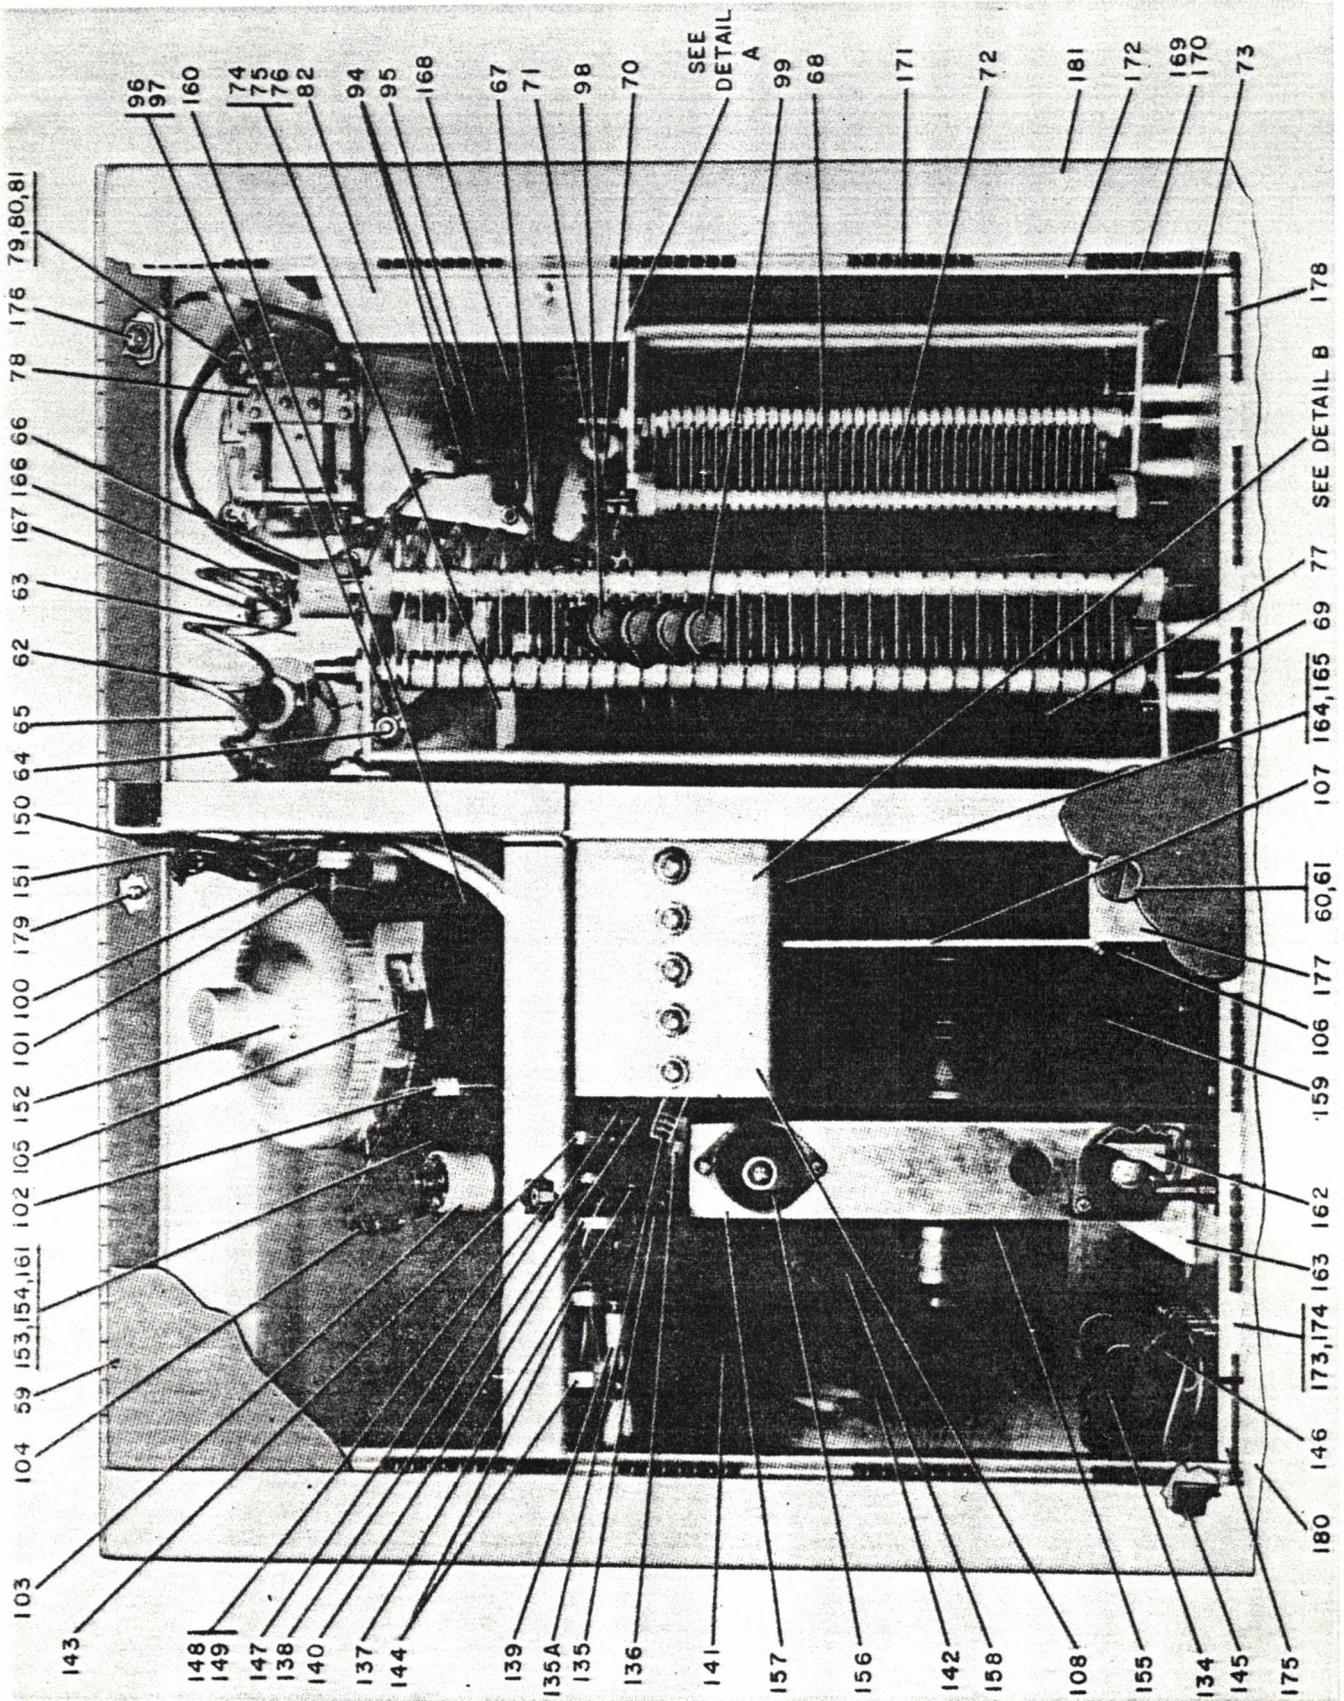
Cabinet Assembly (Sheet 2 of 3)
